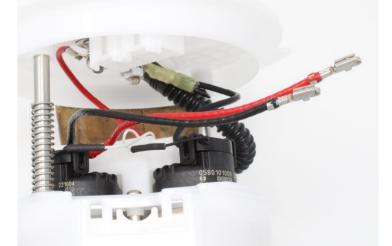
Pump 1 black negative wire is about ½" shorter than the red positive wire when extended as shown. These two wires will go into the removed black plug.
